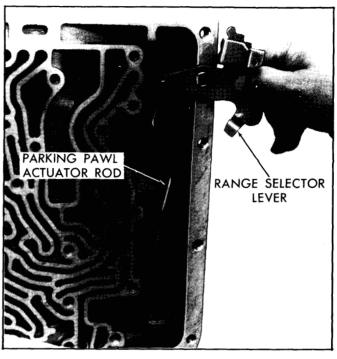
Removing Range Selector Lever and Parking Pawl Actuator Rod from Case
